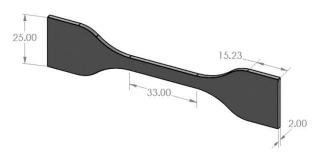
ASTM D638-10 test sample (all dimensions in mm)
